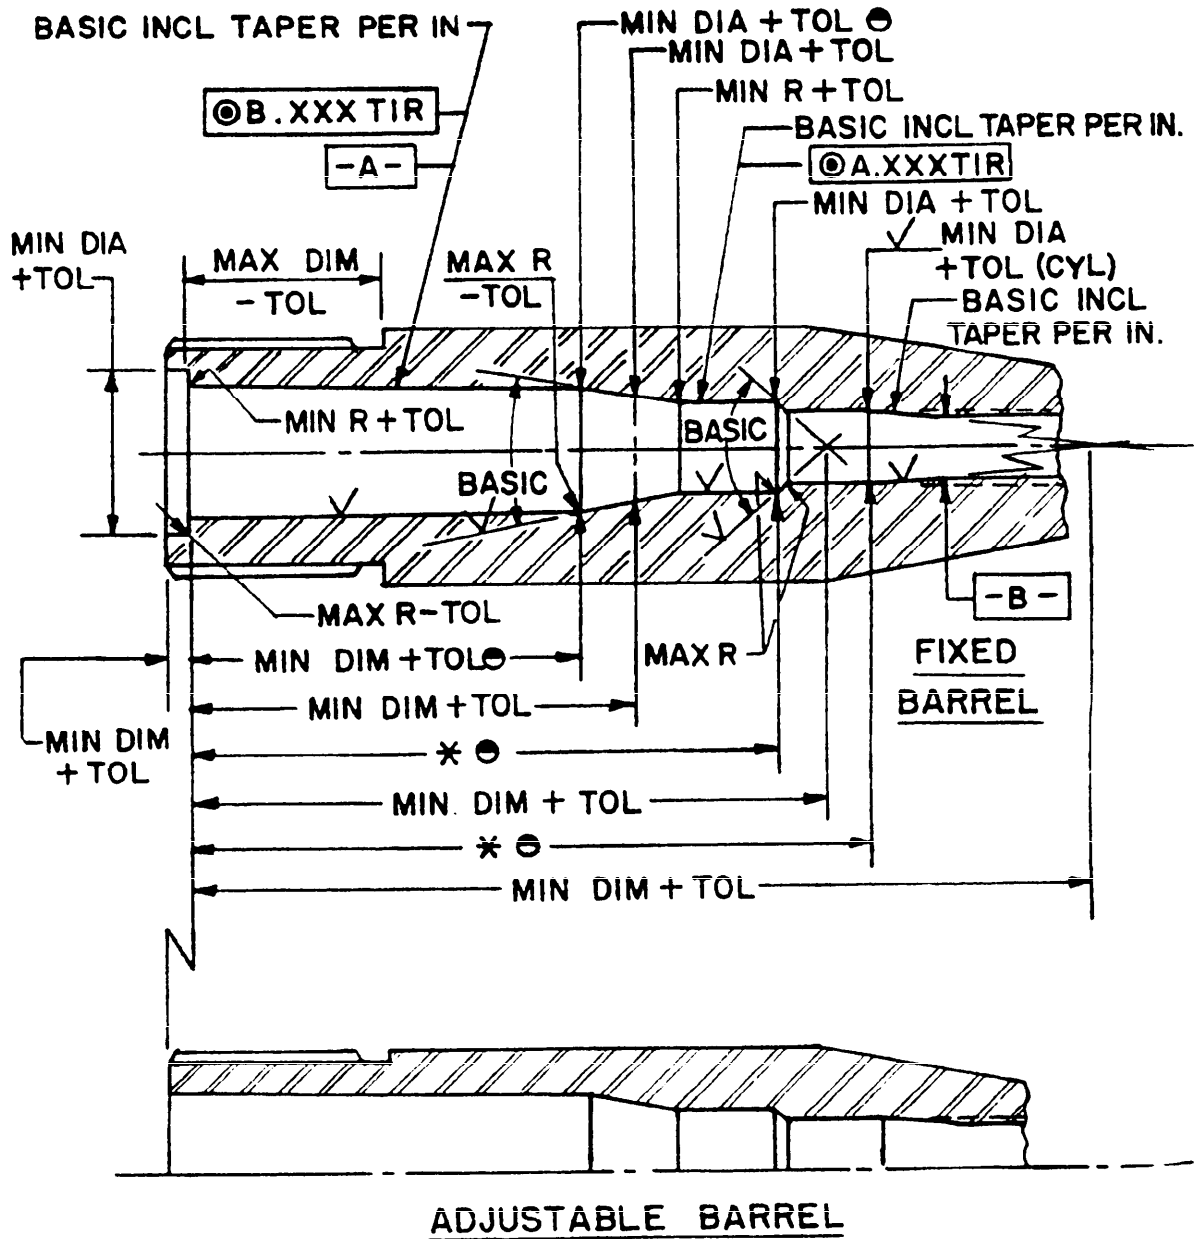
Dimensioning for rimless shoulder type cartridge chamber.
